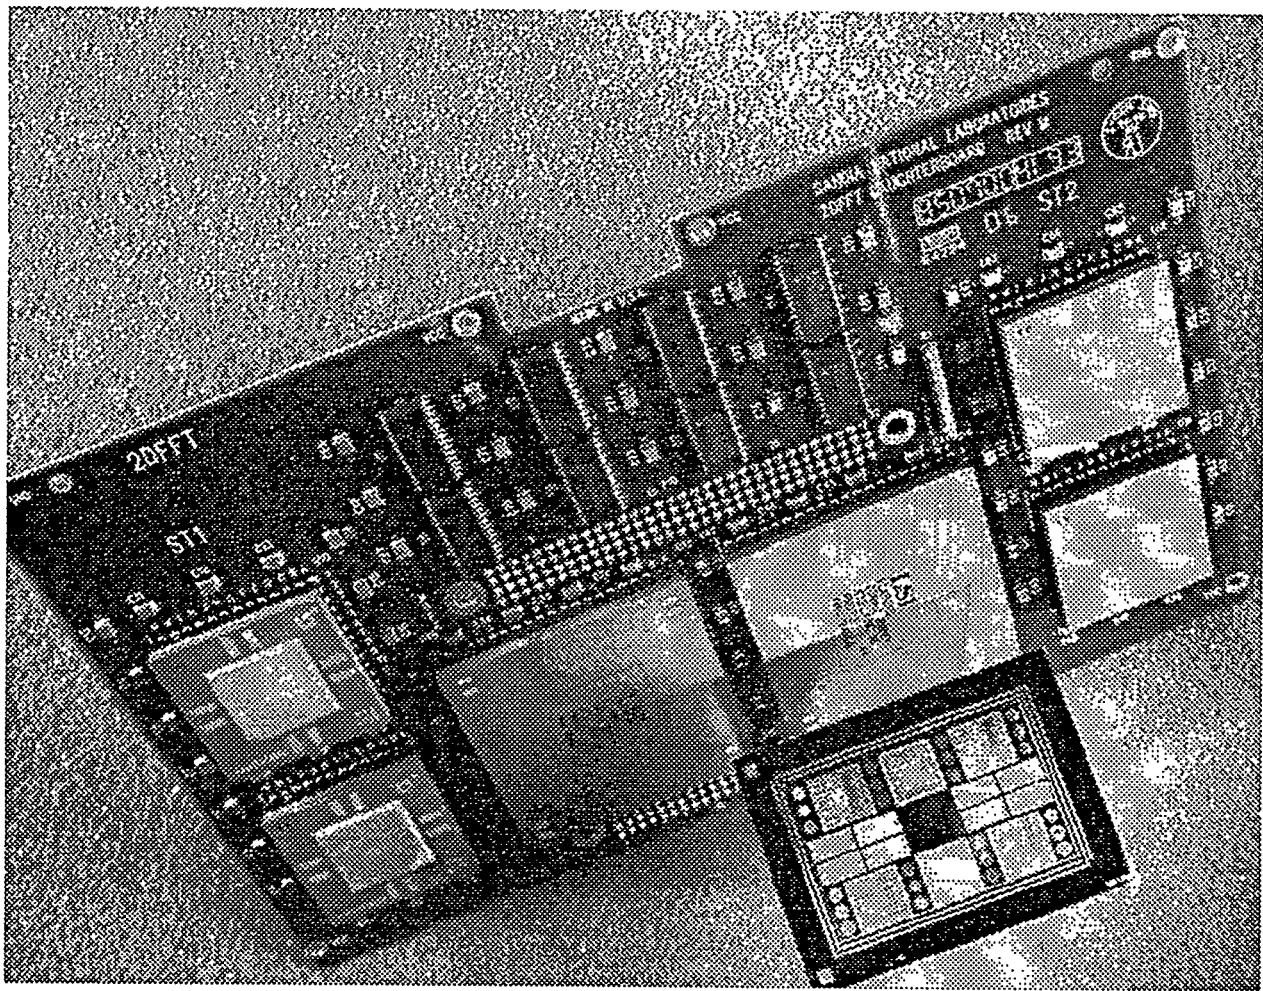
An MCM fabricated with MCM-D technology and its much larger PCB counterpart.
